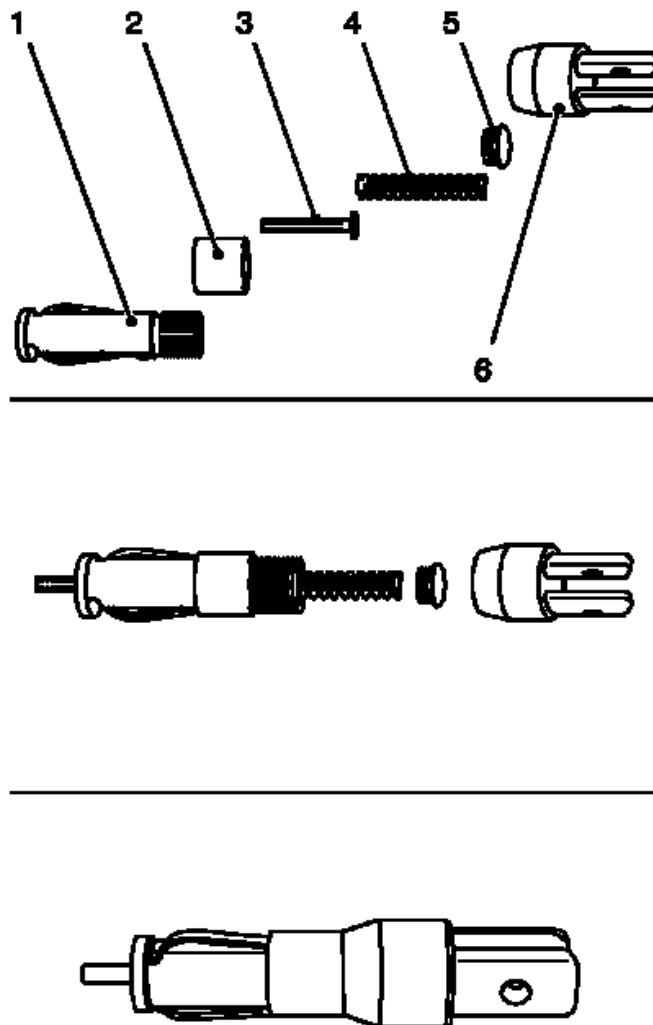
View Of MKM-6086-200-1 Assembly Head Mount, Fixing Sleeve, Thrust Piece, Spring, Screw Fixing And Lever Mount
